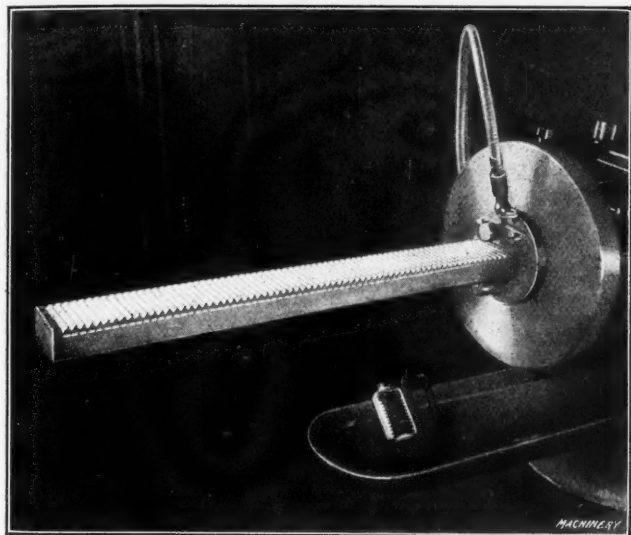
The Broach and Vacuum Cleaner Part it is used to finish
